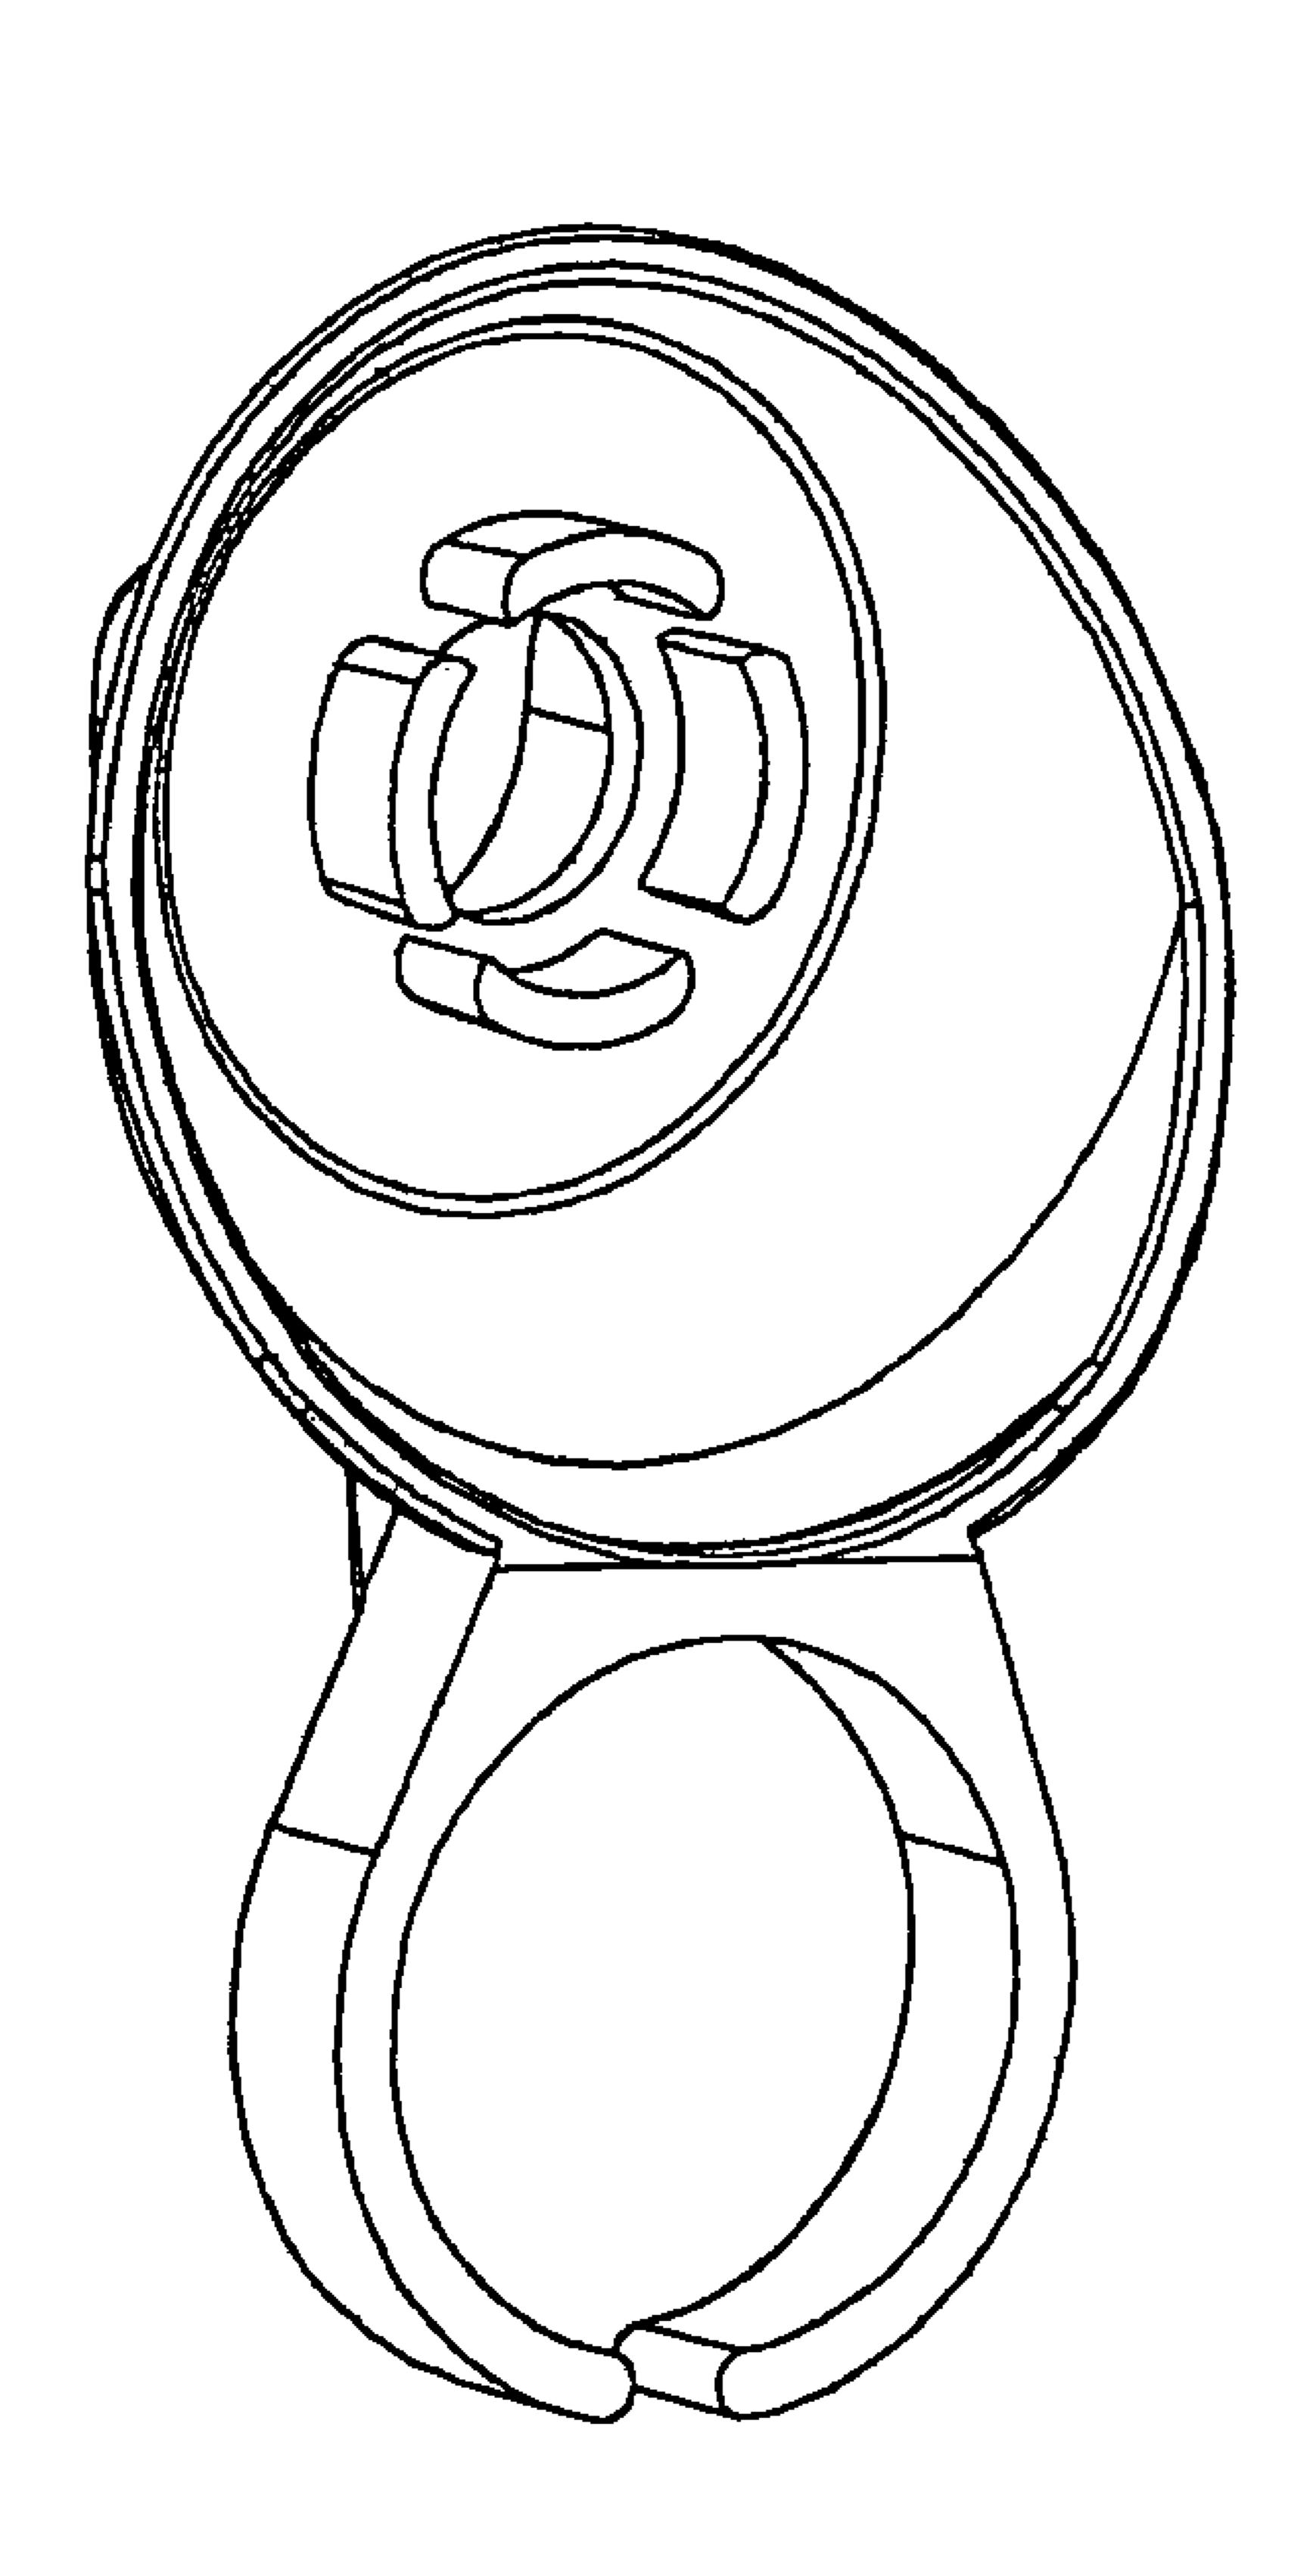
is a view of the mounting head for a spray system from one side, the opposite side to that shown being a substantial mirror image.
